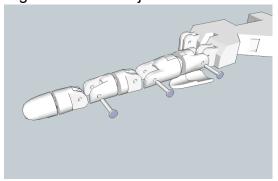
CAD Design for finger three demonstrating how the finger is assembled.
